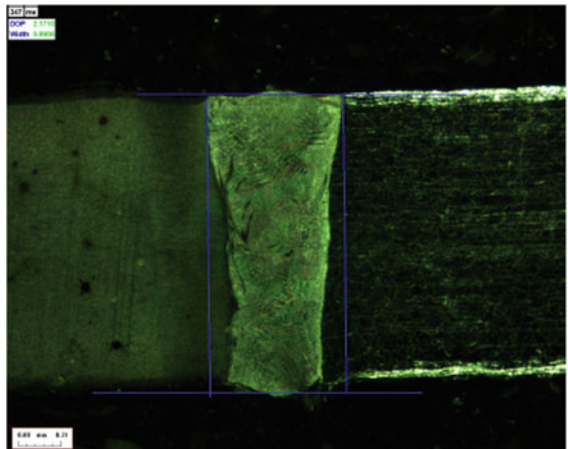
Weld geometry measuring 20X macrographs
